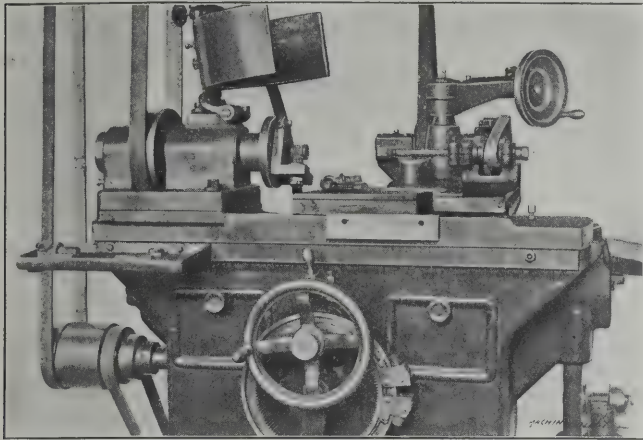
Grinding the Holes in the Universal Joint Pivots
